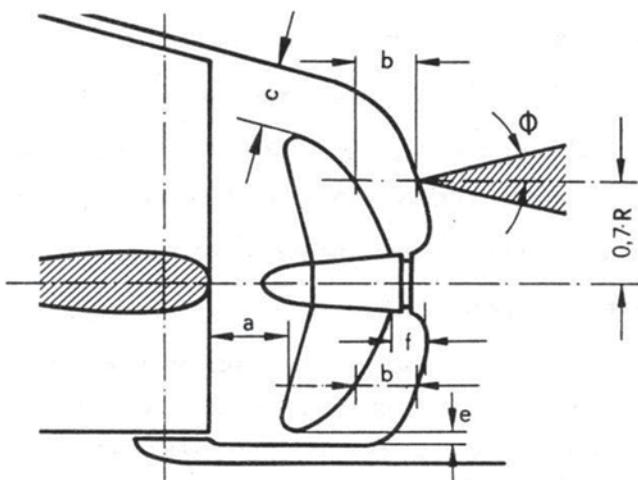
Clearances between propeller and stern hull for ships with sternpost
